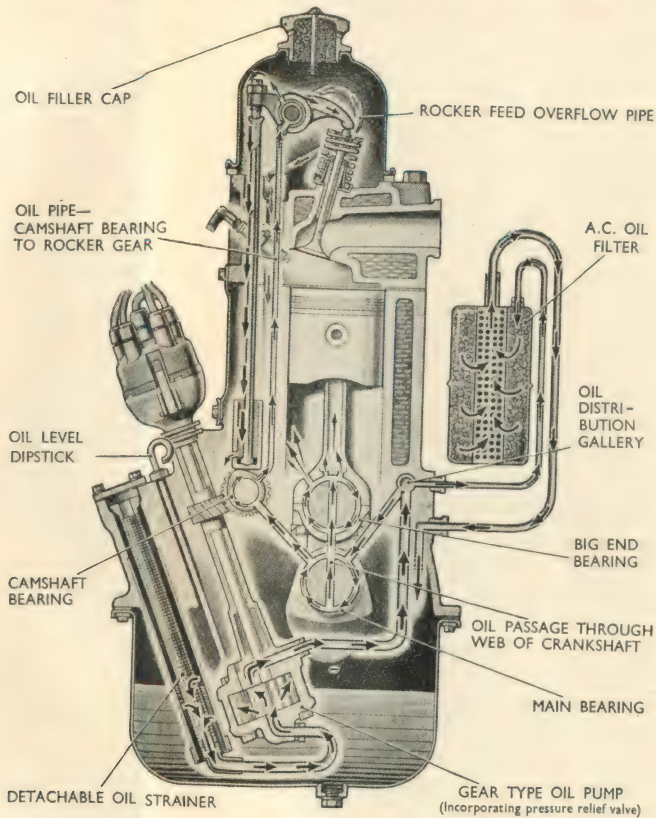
BEDFORD OVERHEAD VALVE ENGINE LUBRICATION SYSTEM
